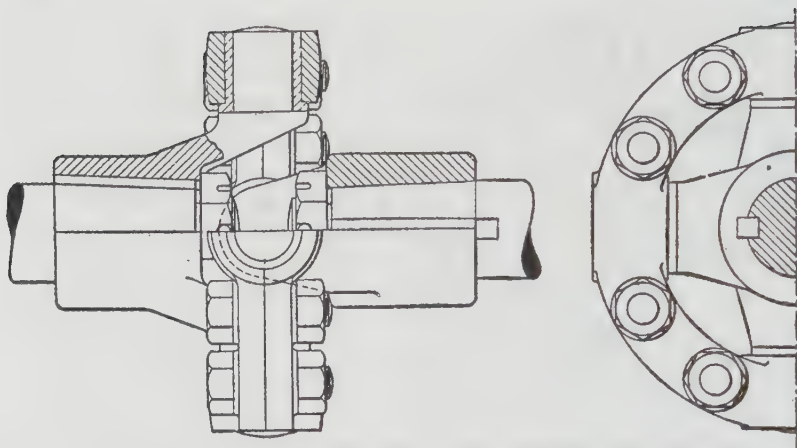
SPLIT RING TYPE OF UNIVERSAL JOINT.
